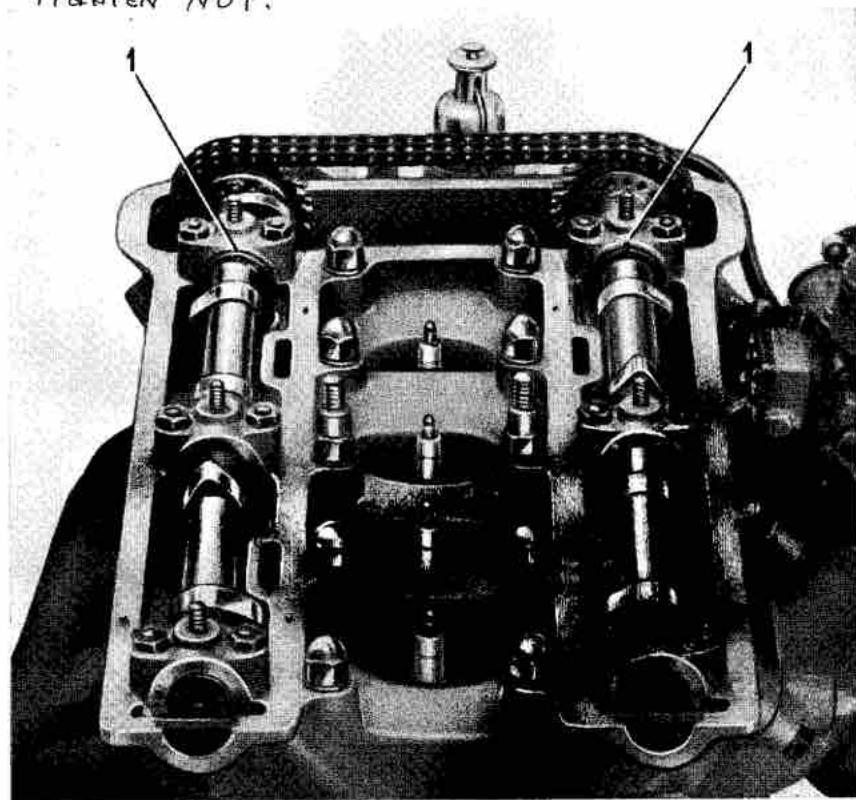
Reference marking (1) cut in the camshafts for timing the valve openings.
